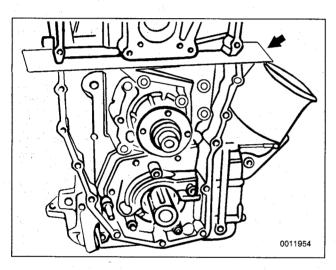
When installing upper timing chain cover, use thin sheet metal (arrow) to protect profile gasket when installing upper cover.
